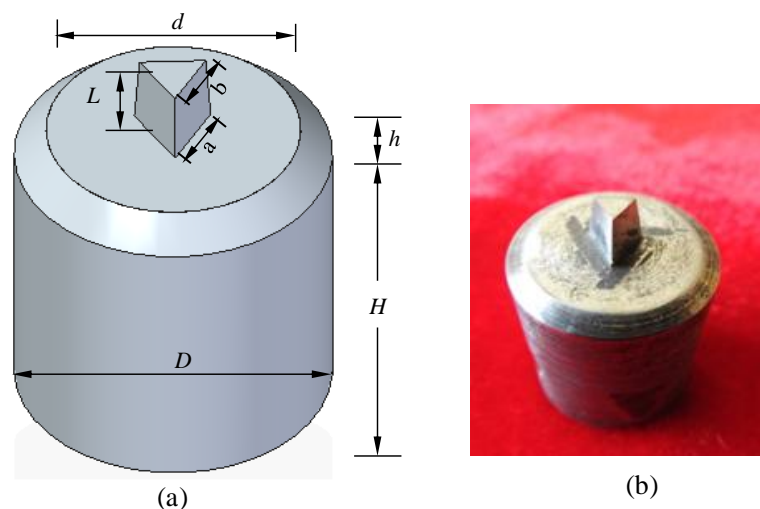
(a) Schematic of taper triangle tool showing the tool dimension and (b) photograph of tool.
